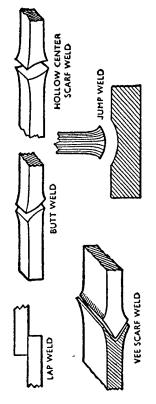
Representative types of hand-made hammer welds as produced when using a blacksmith's forge. Good hammer welds should have about 75 percent of the strength of the metal. Chain is commonly made by hammer welding.
